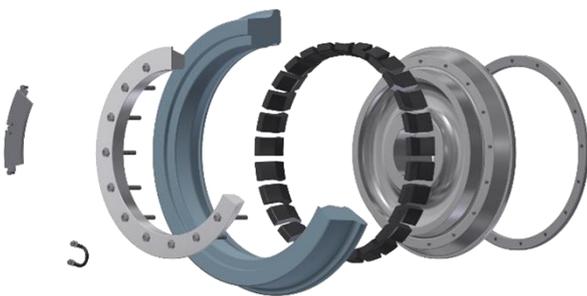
Exploded view of a hybrid wheel. With (from left to right) wheel sound absorber, hybrid shunt, aluminium detachable ring with bolts, high-strength steel wheel tyre, rubber block, aluminium hub and high-strength steel counter bearing.
